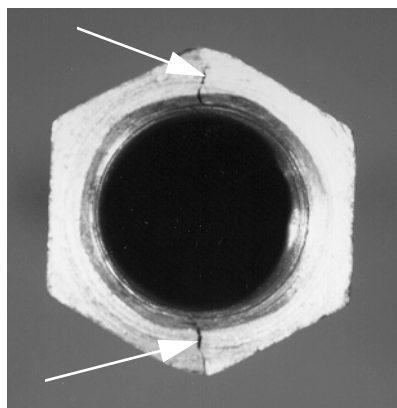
Grab-It™ cable splice — cracks through interior threads - dry threads - torque proof test
